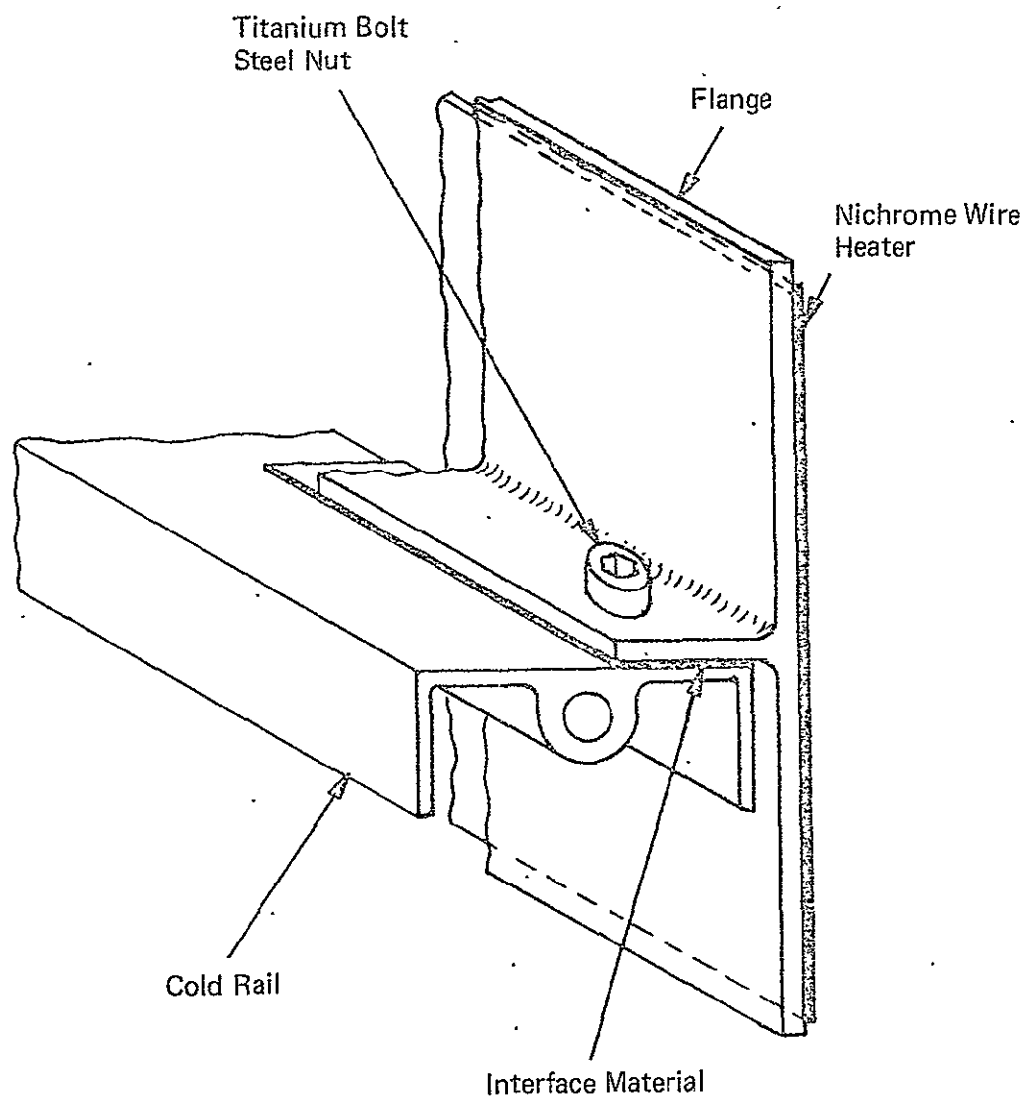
FLANGE—COLD RAIL ASSEMBLY
